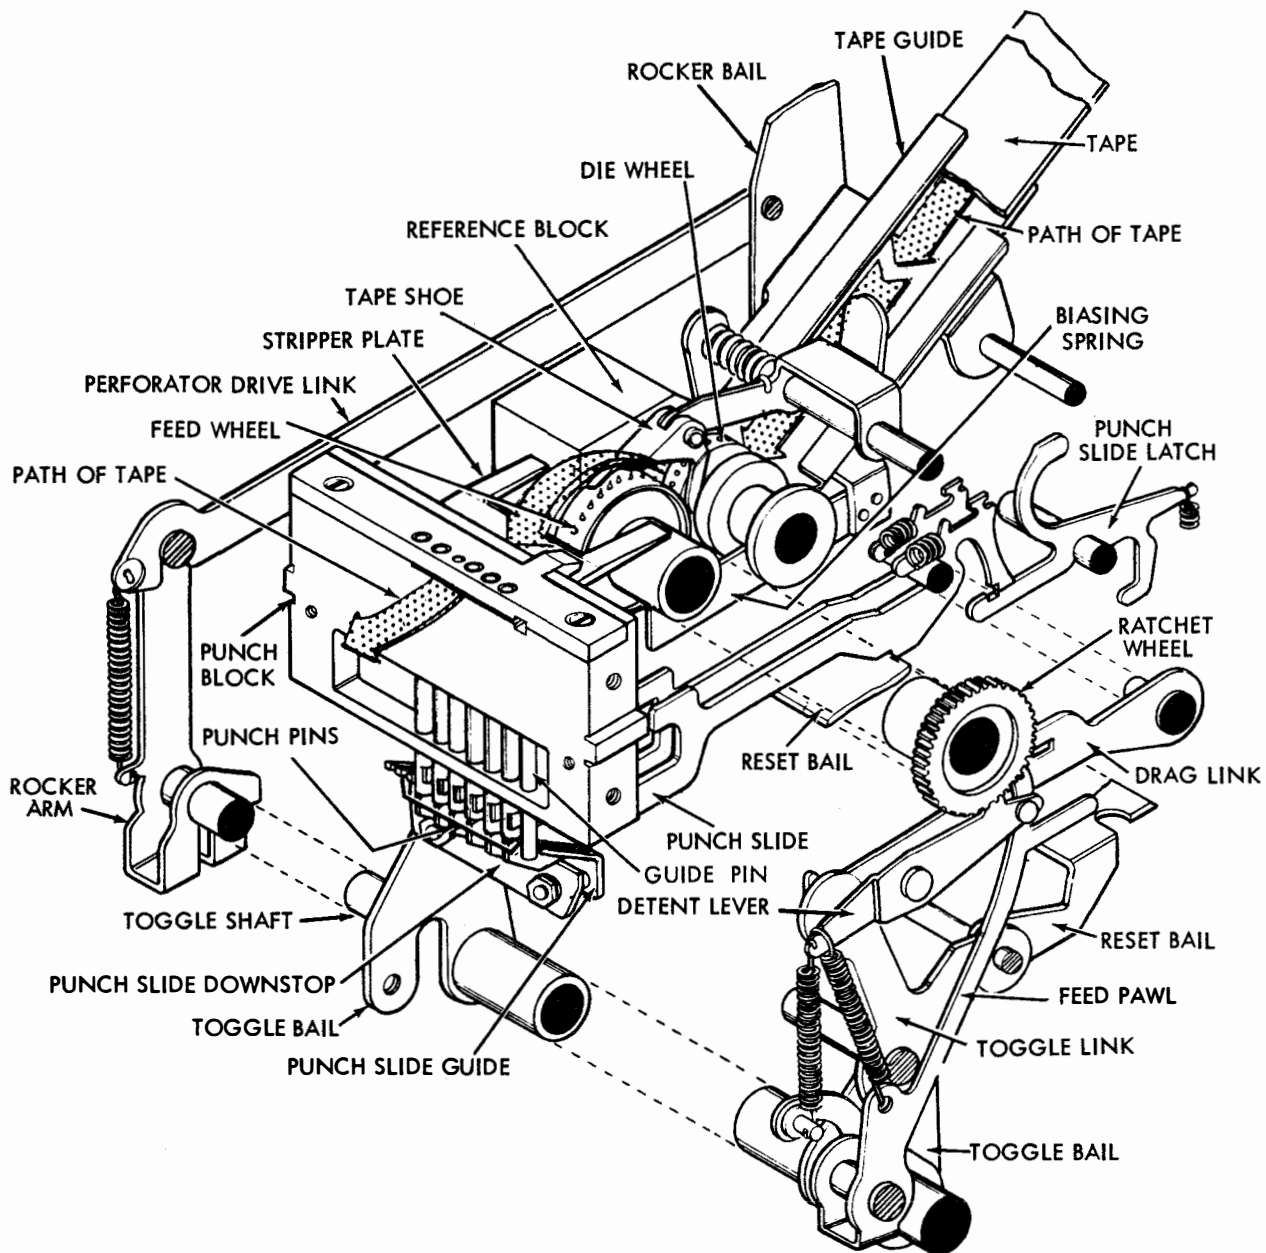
Perforator Mechanism (Fully Perforated Tape) (TT-253A/UG)
